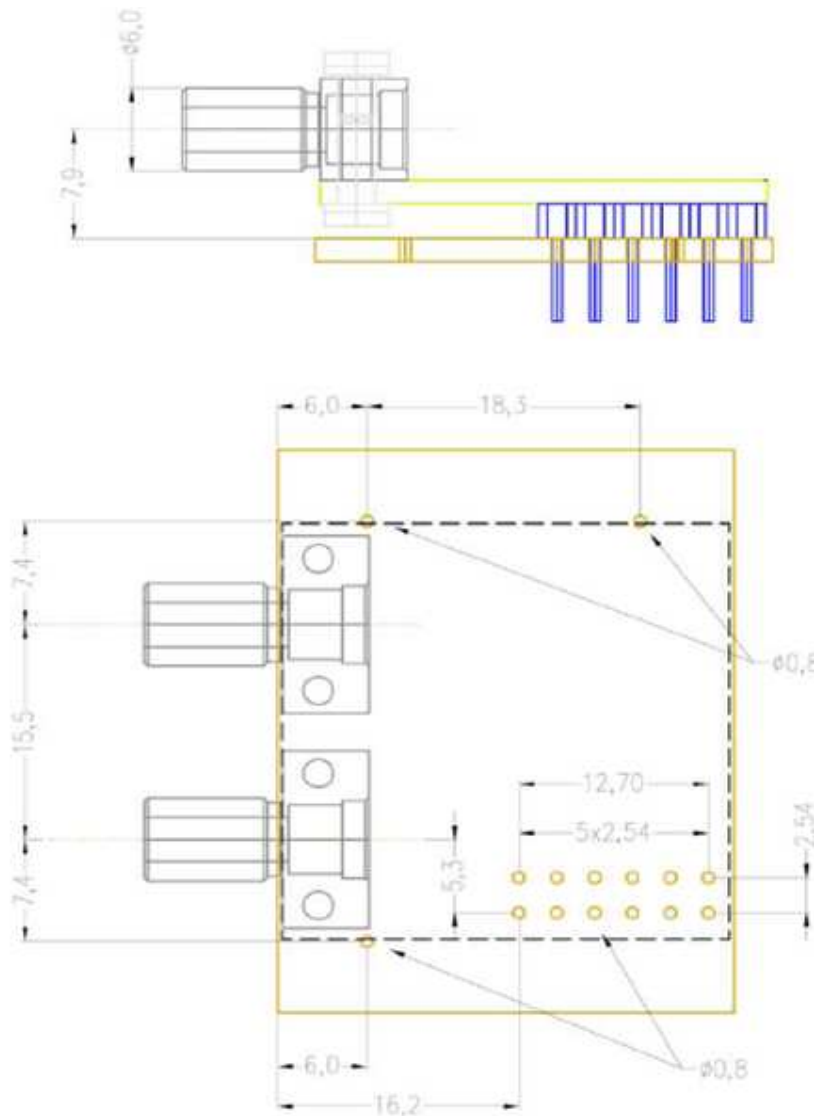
Mechanical dimension (all dimensions given in millimeters)
